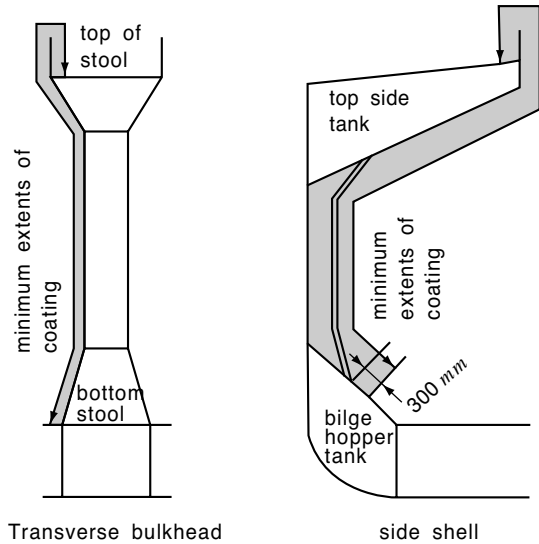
Minimum extent of Corrosion Protection Coatings for Cargo Hold
